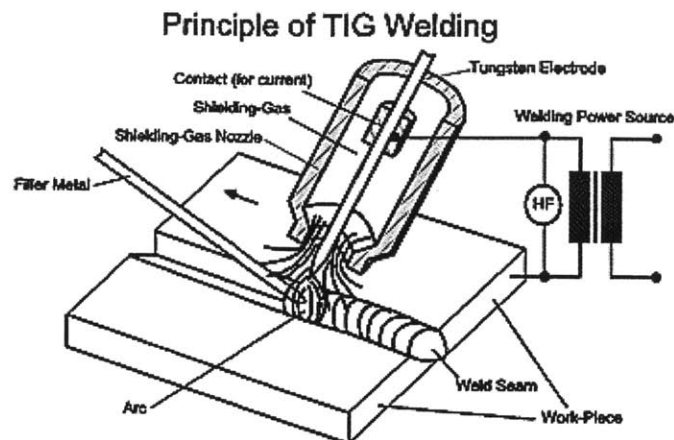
Tungsten Inert Gas (TIG) welding diagram [Azom.com, 2013]
